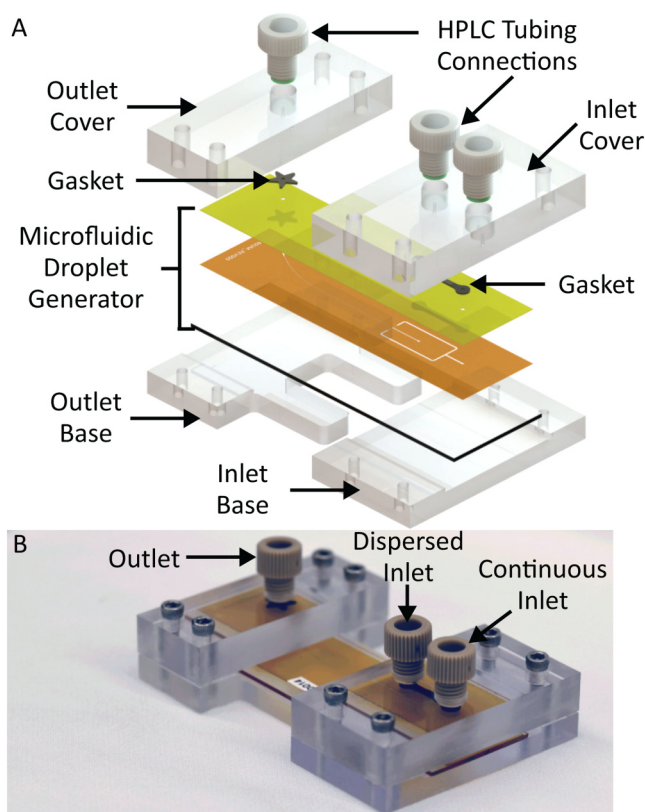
(a) Exploded view of device assembly, highlighting the PEEK connectors (HPLC tubing connections), PC compression covers, compliant fluoroelastomer (gasket), and microfluidic droplet generator assembly. (b) Photograph of the assembled droplet generator.
